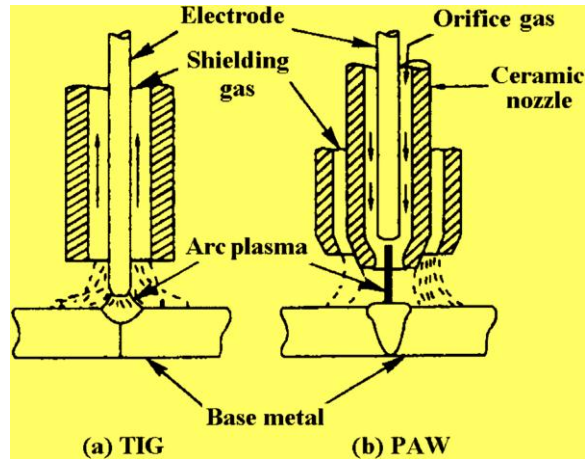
Schematic illustration; (a) TIG welding torch (b) PAW torch [42]
